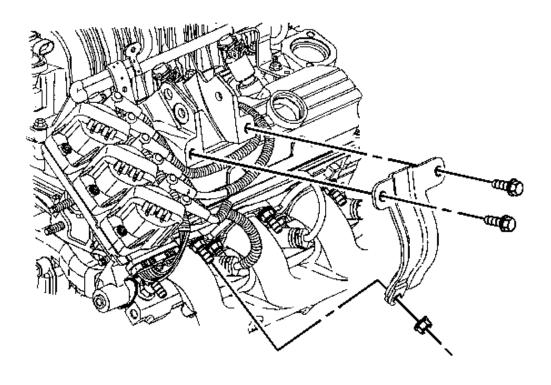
View Of Lower Engine Mount Bracket Courtesy of GENERAL MOTORS CORP.
